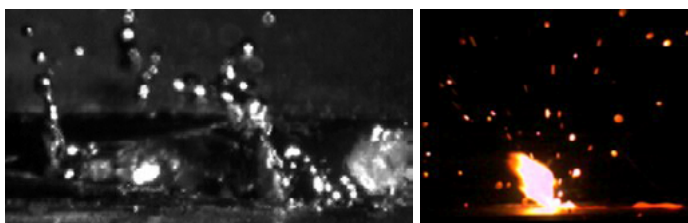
Significant metal spatter recorded using a high-speed camera, during the keyhole welding process performed using a disc laser [18, 21, 22]
